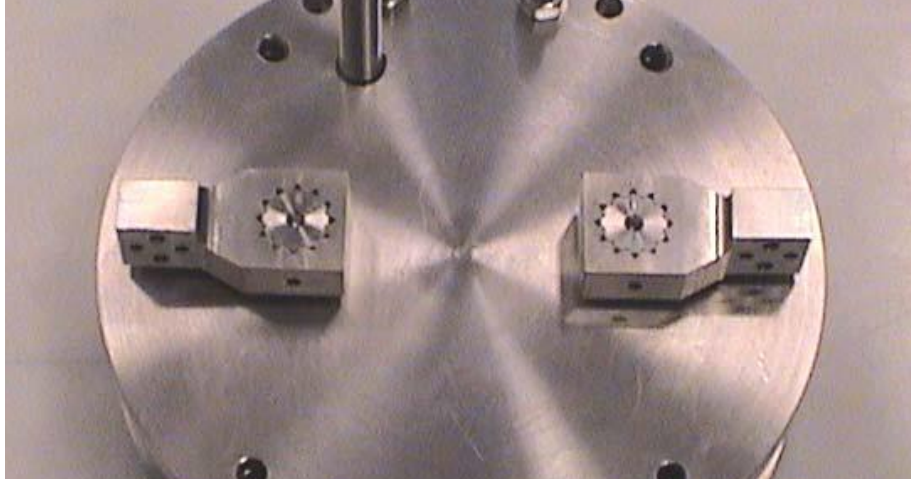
Torque arms mounted to the torque shafts exiting the gear box.
